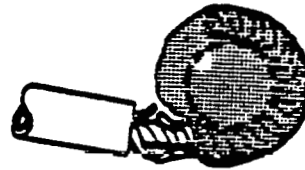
Splayed or Birdcaged Wire Strands at Solder Joint, With Strand Breakage. Usually Shows Exposed Copper in Breakage Area. Reject.
